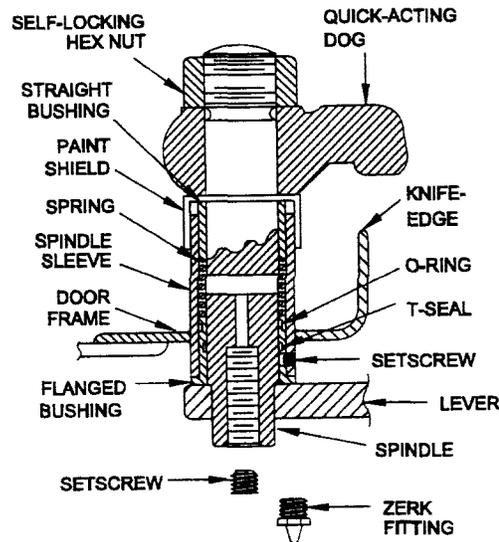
A. Quick-Acting Door Dog Assembly (Cross Section View) Modified by MACHALT 167-31010 (ECP-526)
